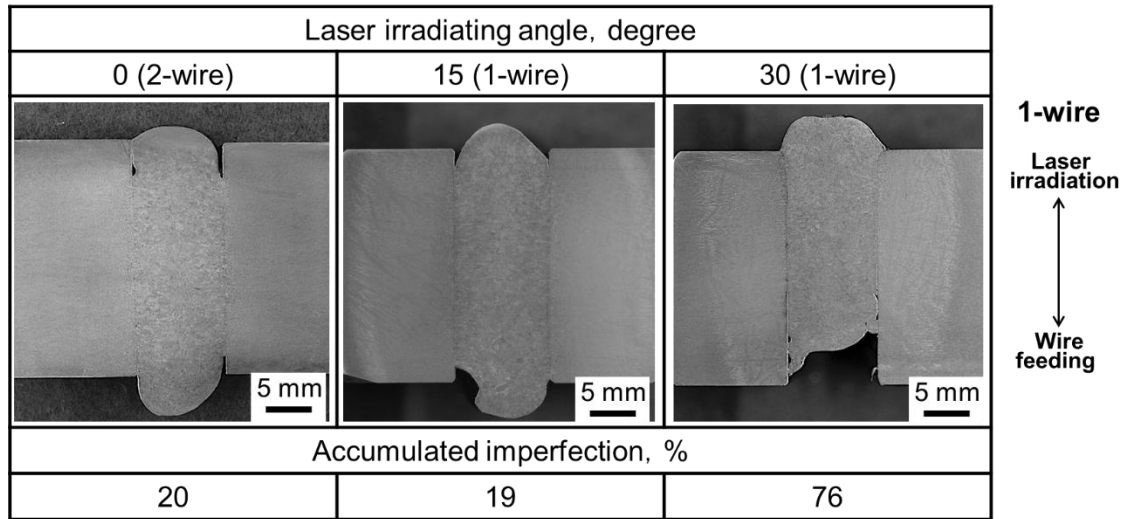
Horizontal cross section (Perpendicular cut of welding direction)
